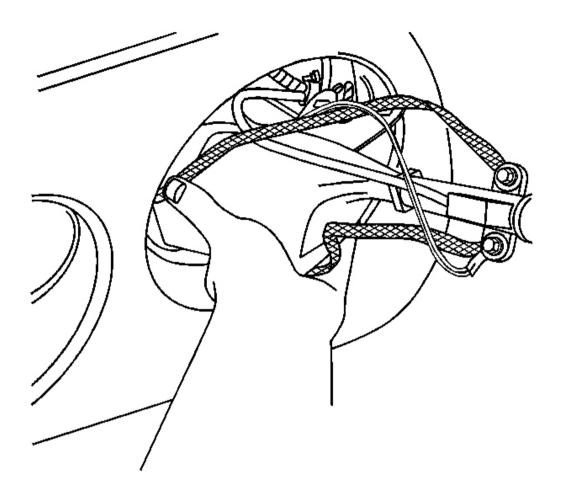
Power Antenna At Taillamp Openings Courtesy of GENERAL MOTORS CORP.
